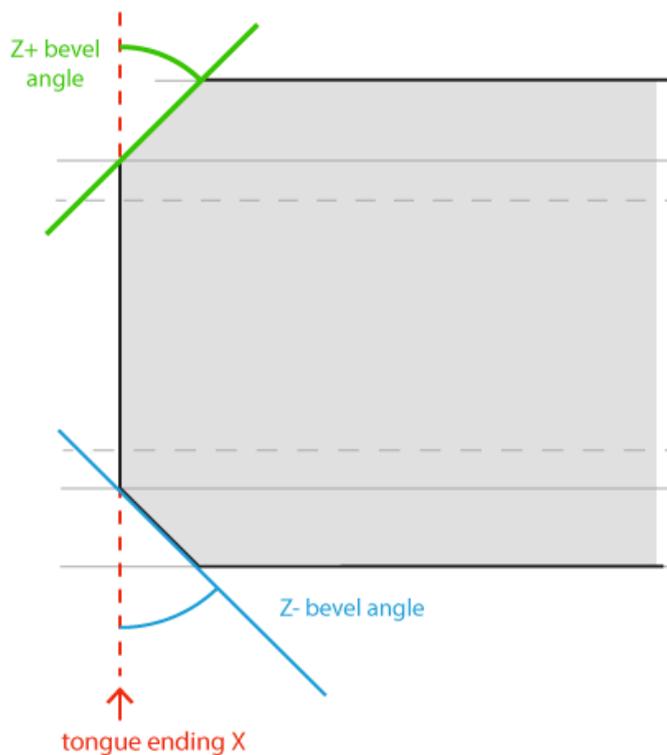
Top view of corner ending welding connection with its parameters
